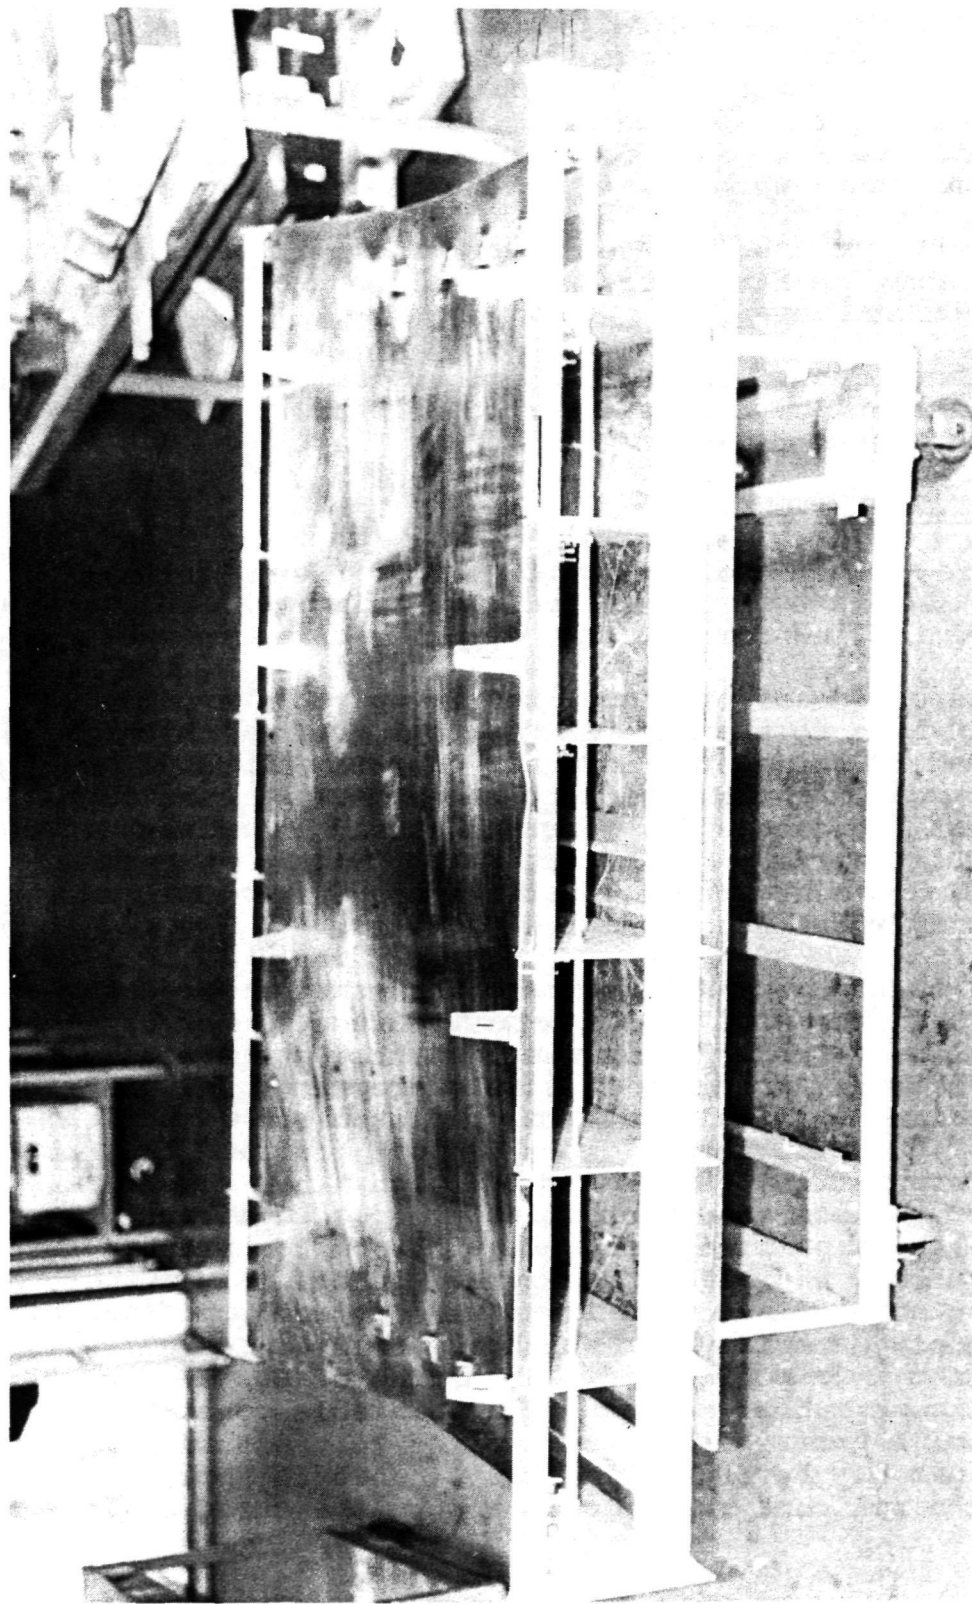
EWR 32381-T60 FUSELAGE COMPOSITE SHELL SECTION MOLDING TOOL.
